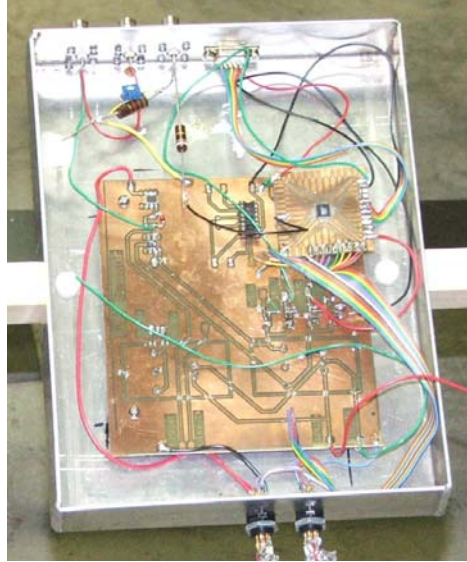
Photograph of the EMI sensor circuit board, consisting of transmitter, receiver and power supply subsystem on a single circuit board, inside an aluminum box. The size of the sensor board is 15.5 cm by 13 cm.
